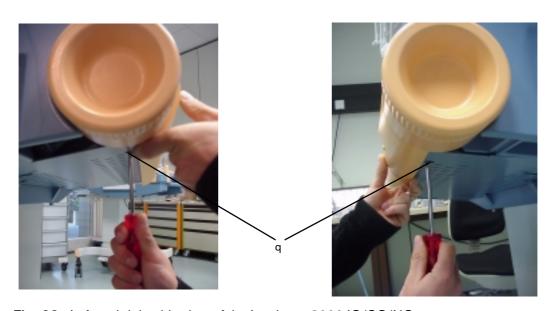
Left and right side view of the Incubator 8000 IC/SC/NC
